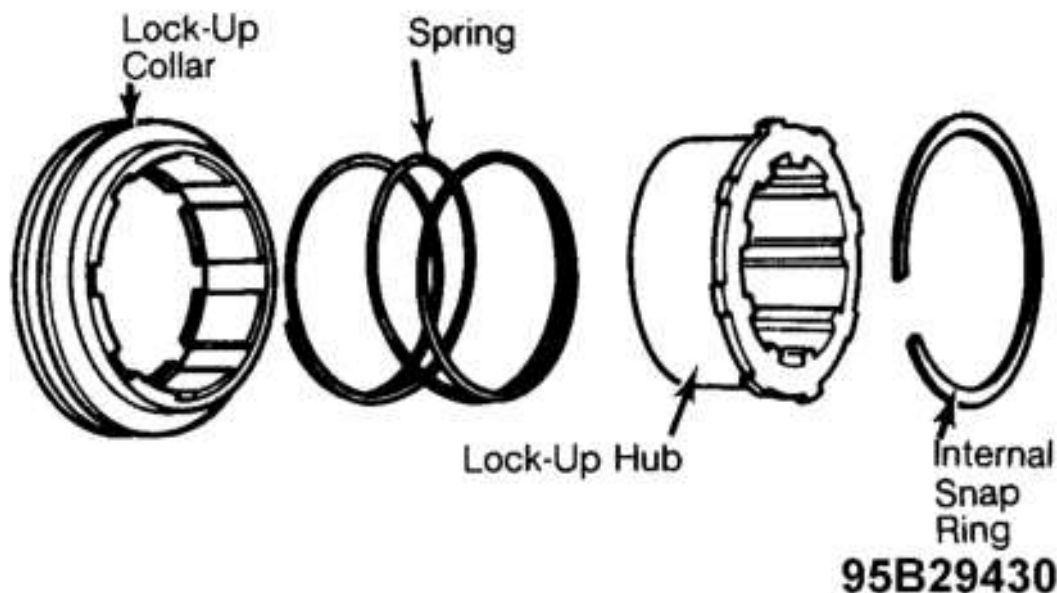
Exploded View 2WD/4WD Lock-Up Assembly
